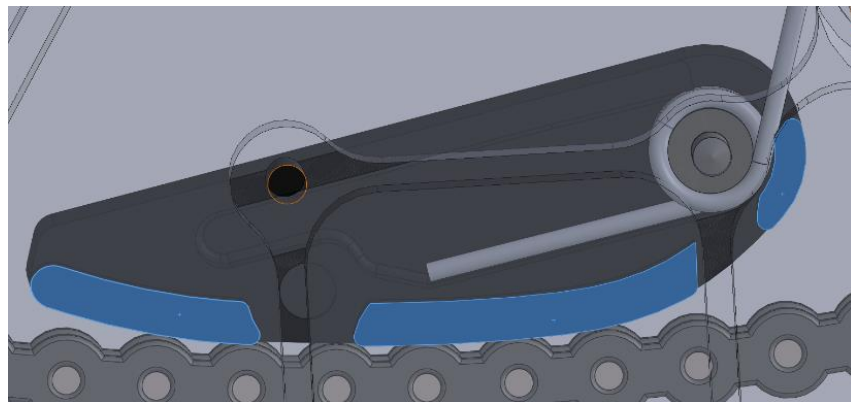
Chain Tensioner Fail-safe Ribs (blue) clash with casing pocket before system failure
